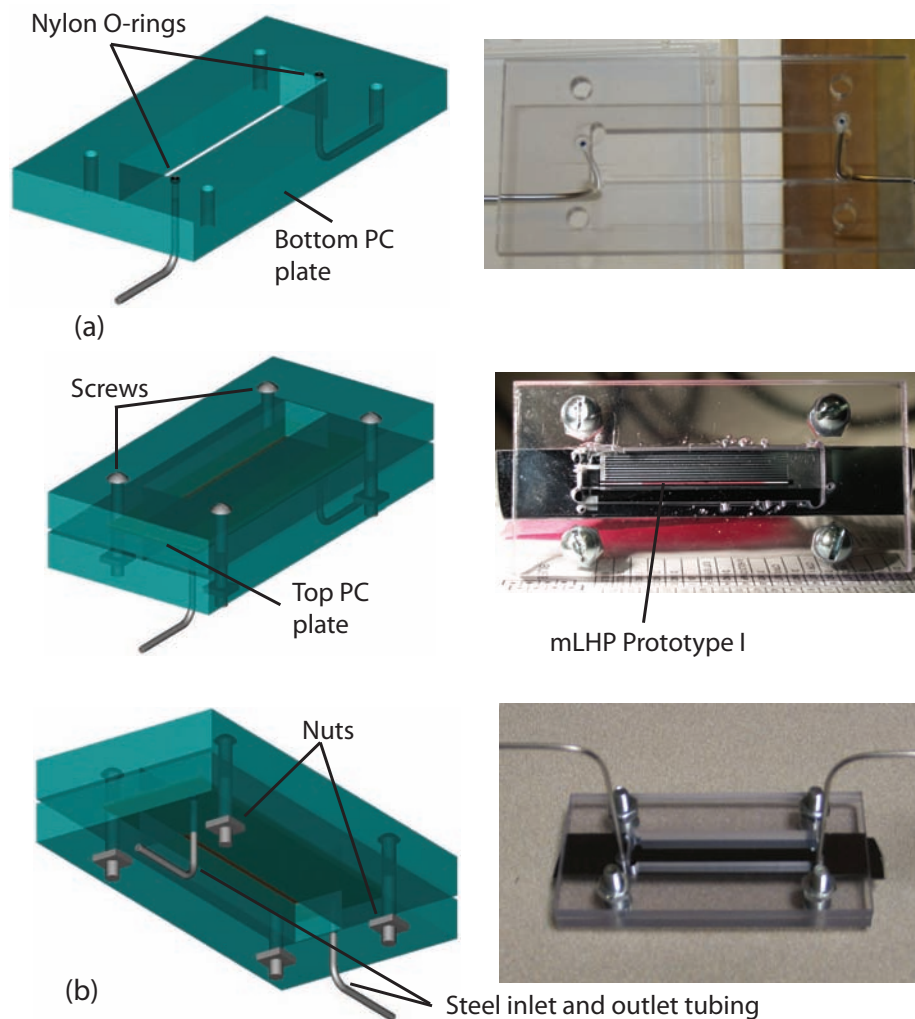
Mechanically sealed plastic packaging (Method I): (a) The bottom polycarbonate (PC) plate has drilled holes containing O-rings, which align with the fill holes etched into the μ LHP device. Steel microtubing is interference-fitted into these holes. A window in the bottom plate allows for the application of heat to the device evaporator section. (b) A top polycarbonate plate (with an observation window) is used to mechanically seal the package by applying pressure on the sandwiched μ LHP device using screws.
